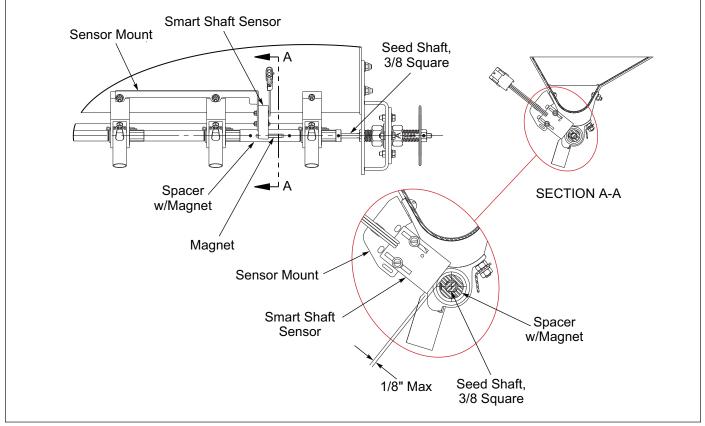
Brillion Elite Mini Monitor - Seed Meter Box Shaft Sensor - Dimensions
